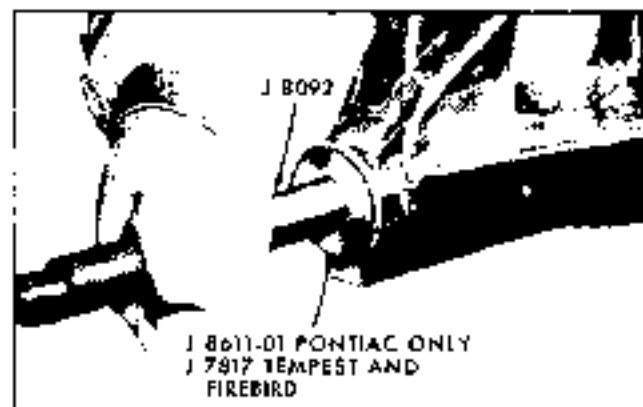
A-33 Installing Front Pinion Bearing Outer Race
